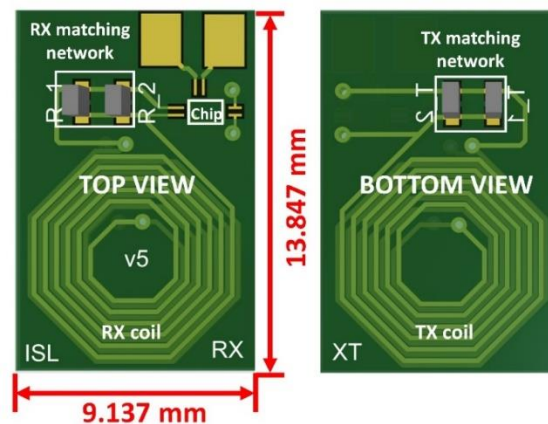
Top and bottom view of the miniaturized 4-layer PCB.
